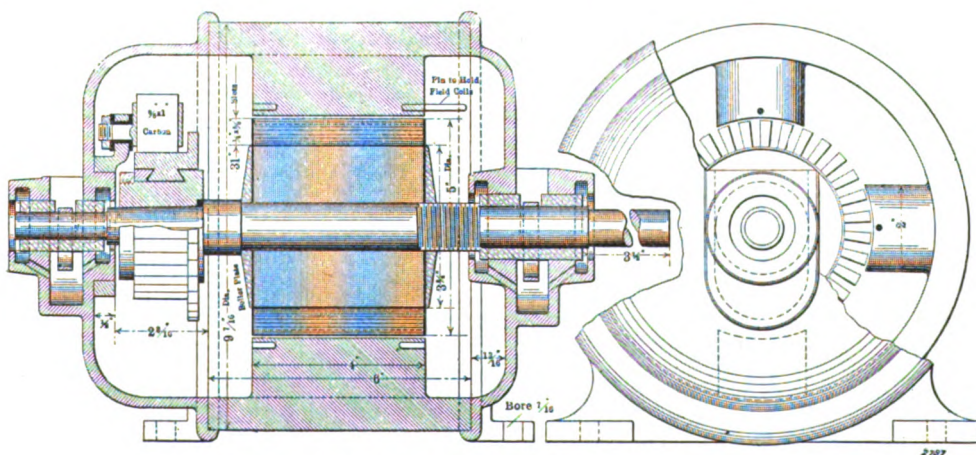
and 2 show side and end elevations, respectively, of an assembled machine of the enclosed type. Figs. 3 and 4 illustrate an open type of bonnet for the commutator end. For the pulley side bonnet the same pattern may be used as is used for the enclosed type of motor, eight $1\frac{1}{4}$ in. holes being afterwards bored through the sides of the bonnet. The field structure and bonnets of the machine are intended to be made of cast iron, which is easily obtained by the amateur, and is easy to machine, although the motor with a cast-iron field structure does not develop nearly so much power as one having a steel field structure, size for size. Cast iron, however, will answer for the purpose of the design. If
